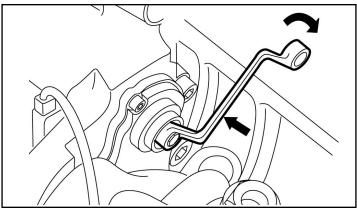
ADJUSTMENT MECHANISM TEST
